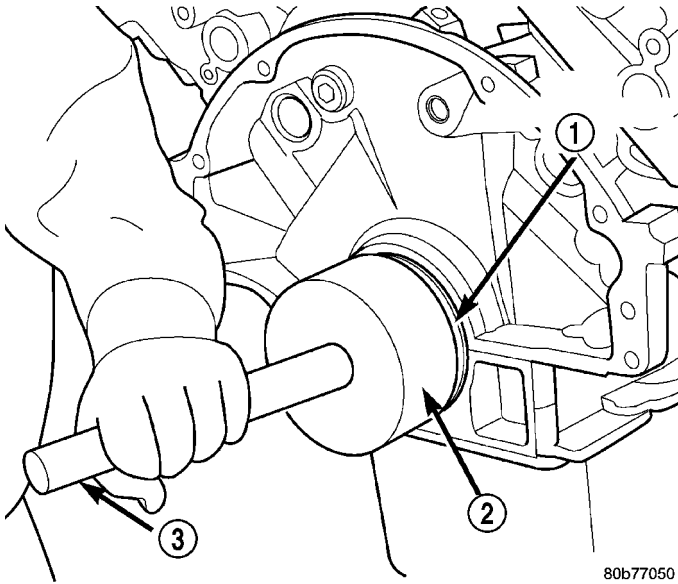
Crankshaft Rear Oil Seal Guide Special Tool 8349-2 and Oil
